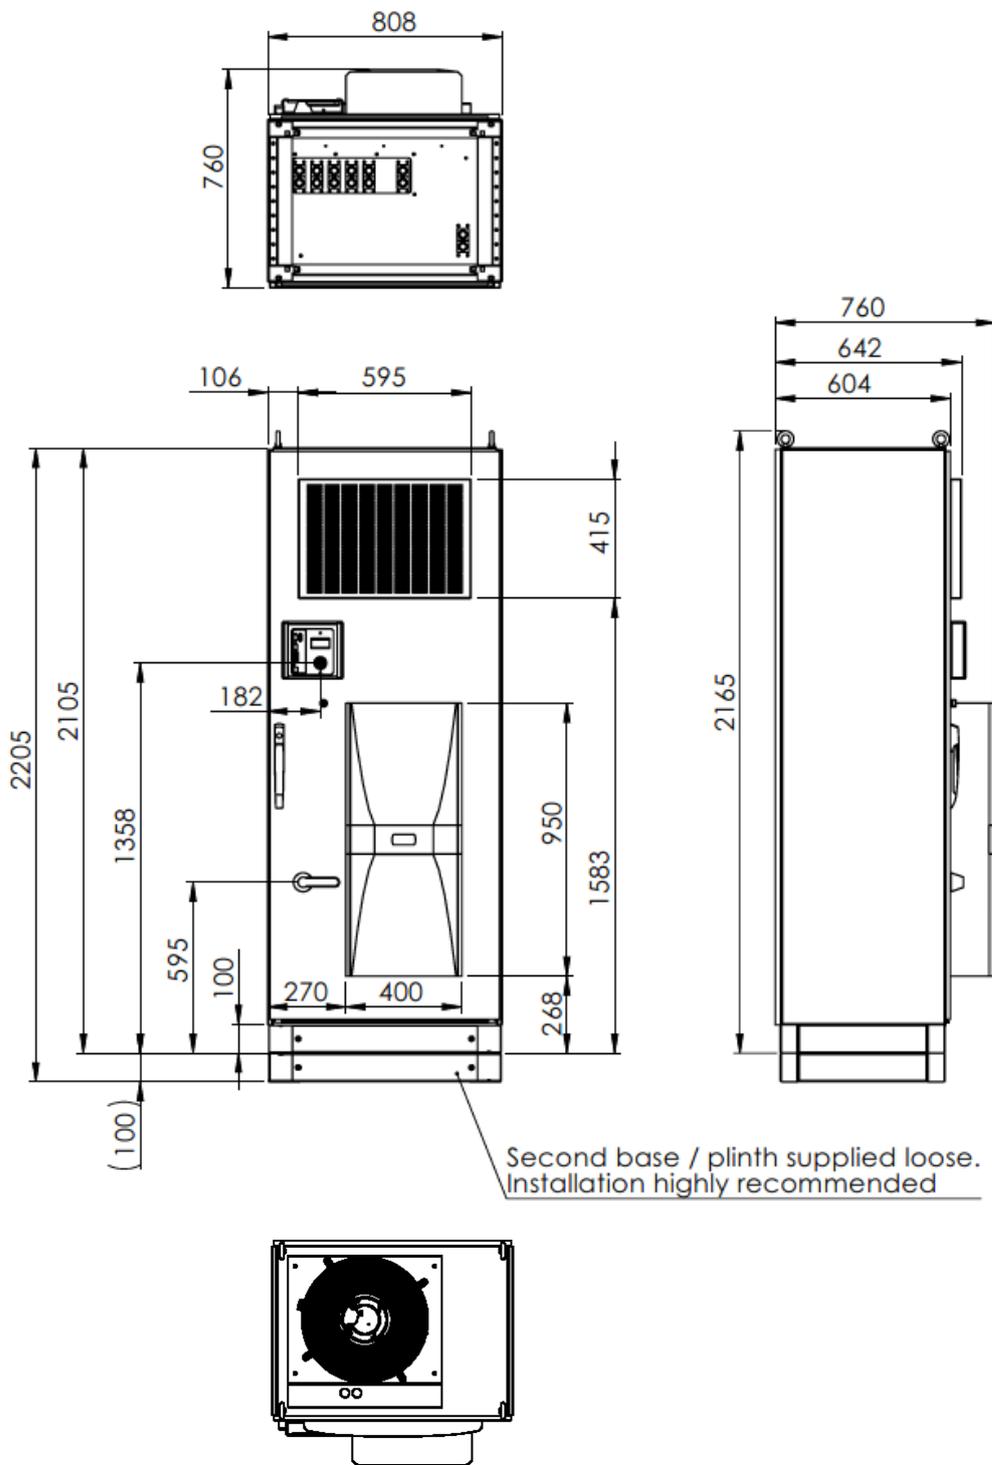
Dimensional drawings ECOsine® active FN3430-200/250/300-400-4 (with mounted base 100 mm)\
